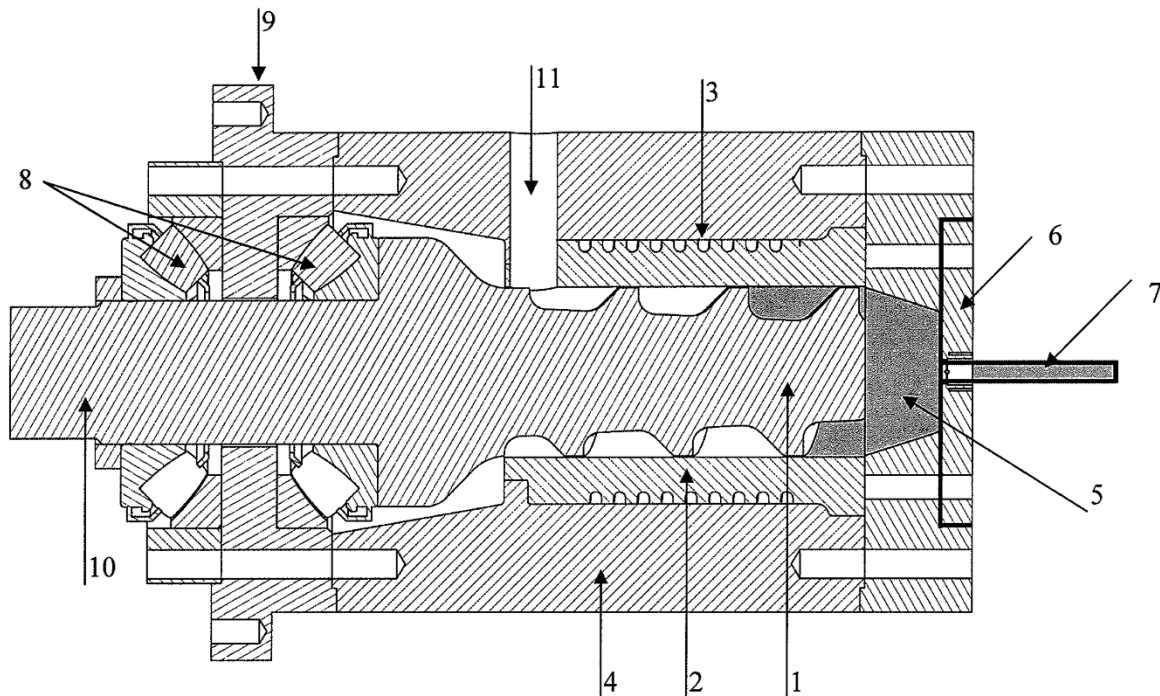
Schematic illustration of the cross-sectional view of an extruder. (1) screw, (2) liner, (3) cooling channel, (4) screw housing, (5) extrusion chamber, (6) die, (7) extruded product, (8) thrust bearing, (9) support plate, (10) screw shaft, (11) inlet (source [70]).
